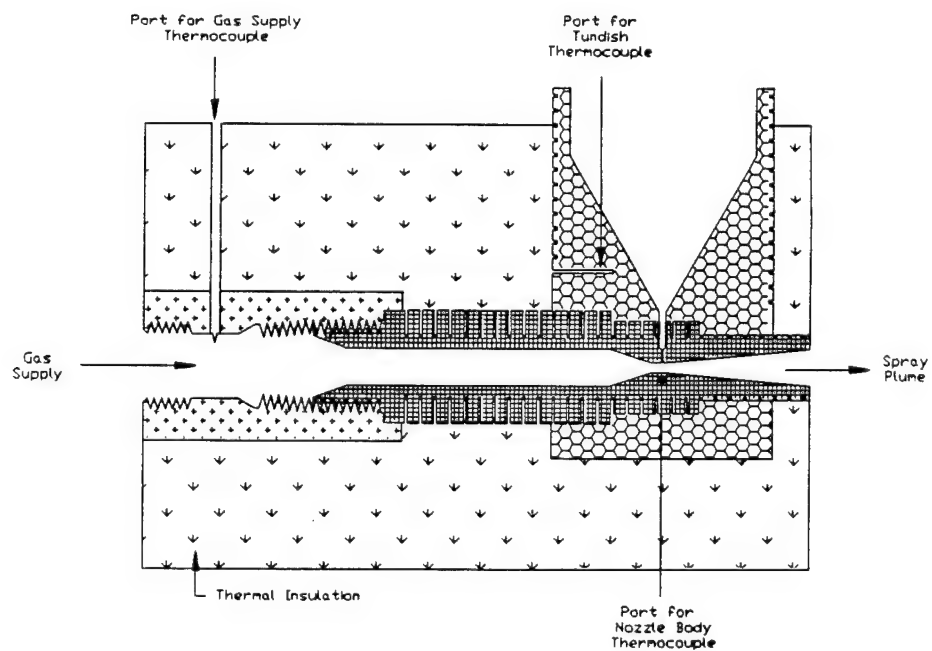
Cross Section of the Nozzle/Tundish Assembly.
